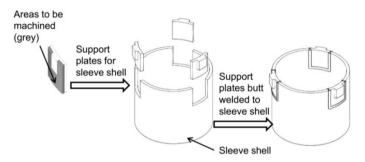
Machined support plates welded with the sleeve shell
